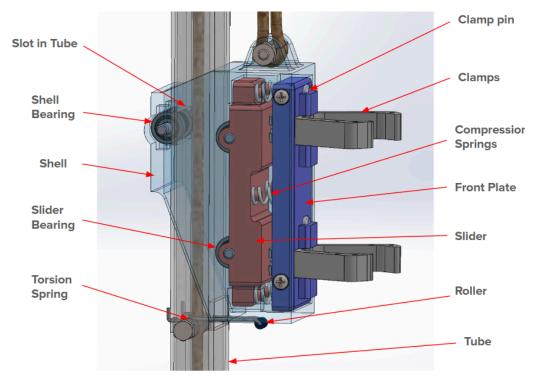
Shell Housing Sub Assembly and Interface with Tube
